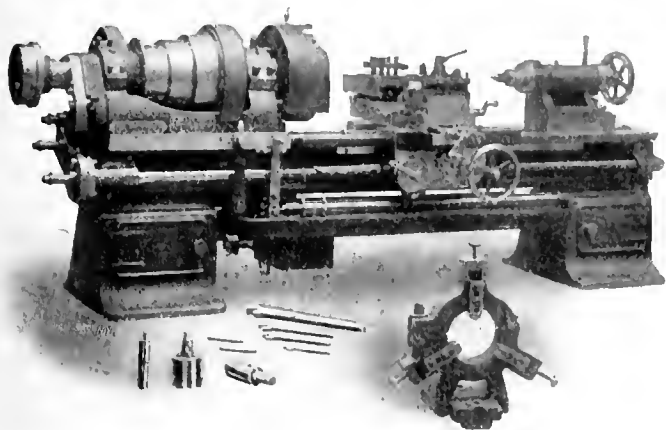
Eighteen-inch Hollow Spindle Lathe for Operating on Bars four inches Diameter or less.
